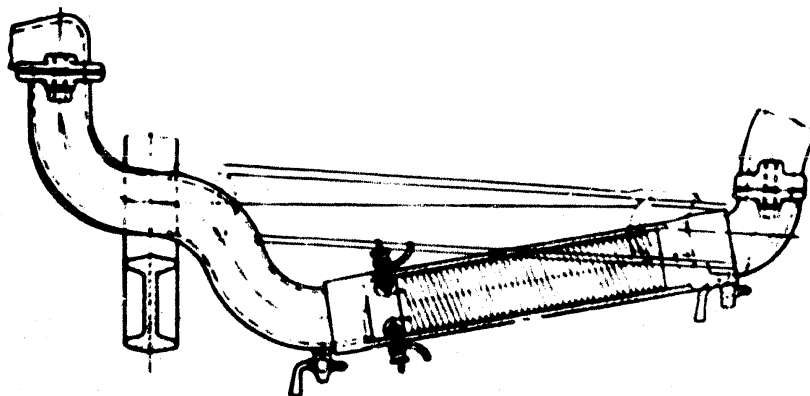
Mounting of the Heating Element into Pipe of Cooling System of ZIS-5 Engine
